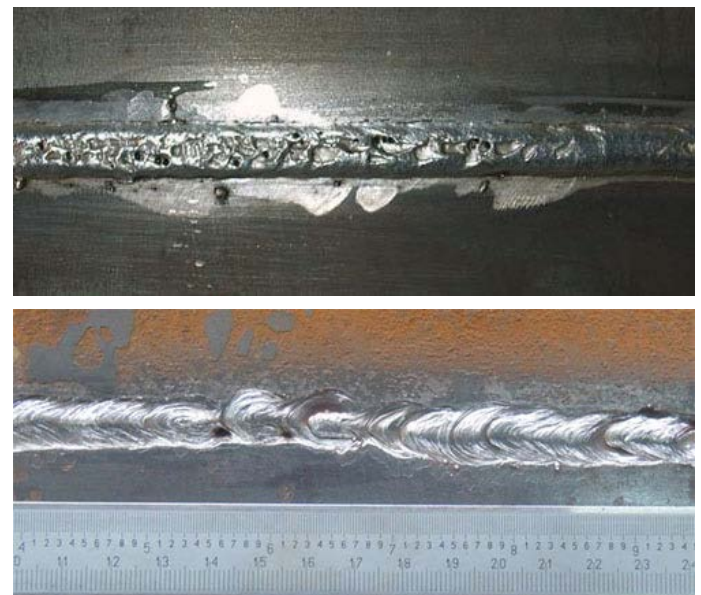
Joints welded under water: a) S355J2G3 steel, flux-cored arc welding using the local dry chamber method, visible numerous gas pores; b) S420G2+M steel, wet MMA welding, visible undercuts and gas pores
